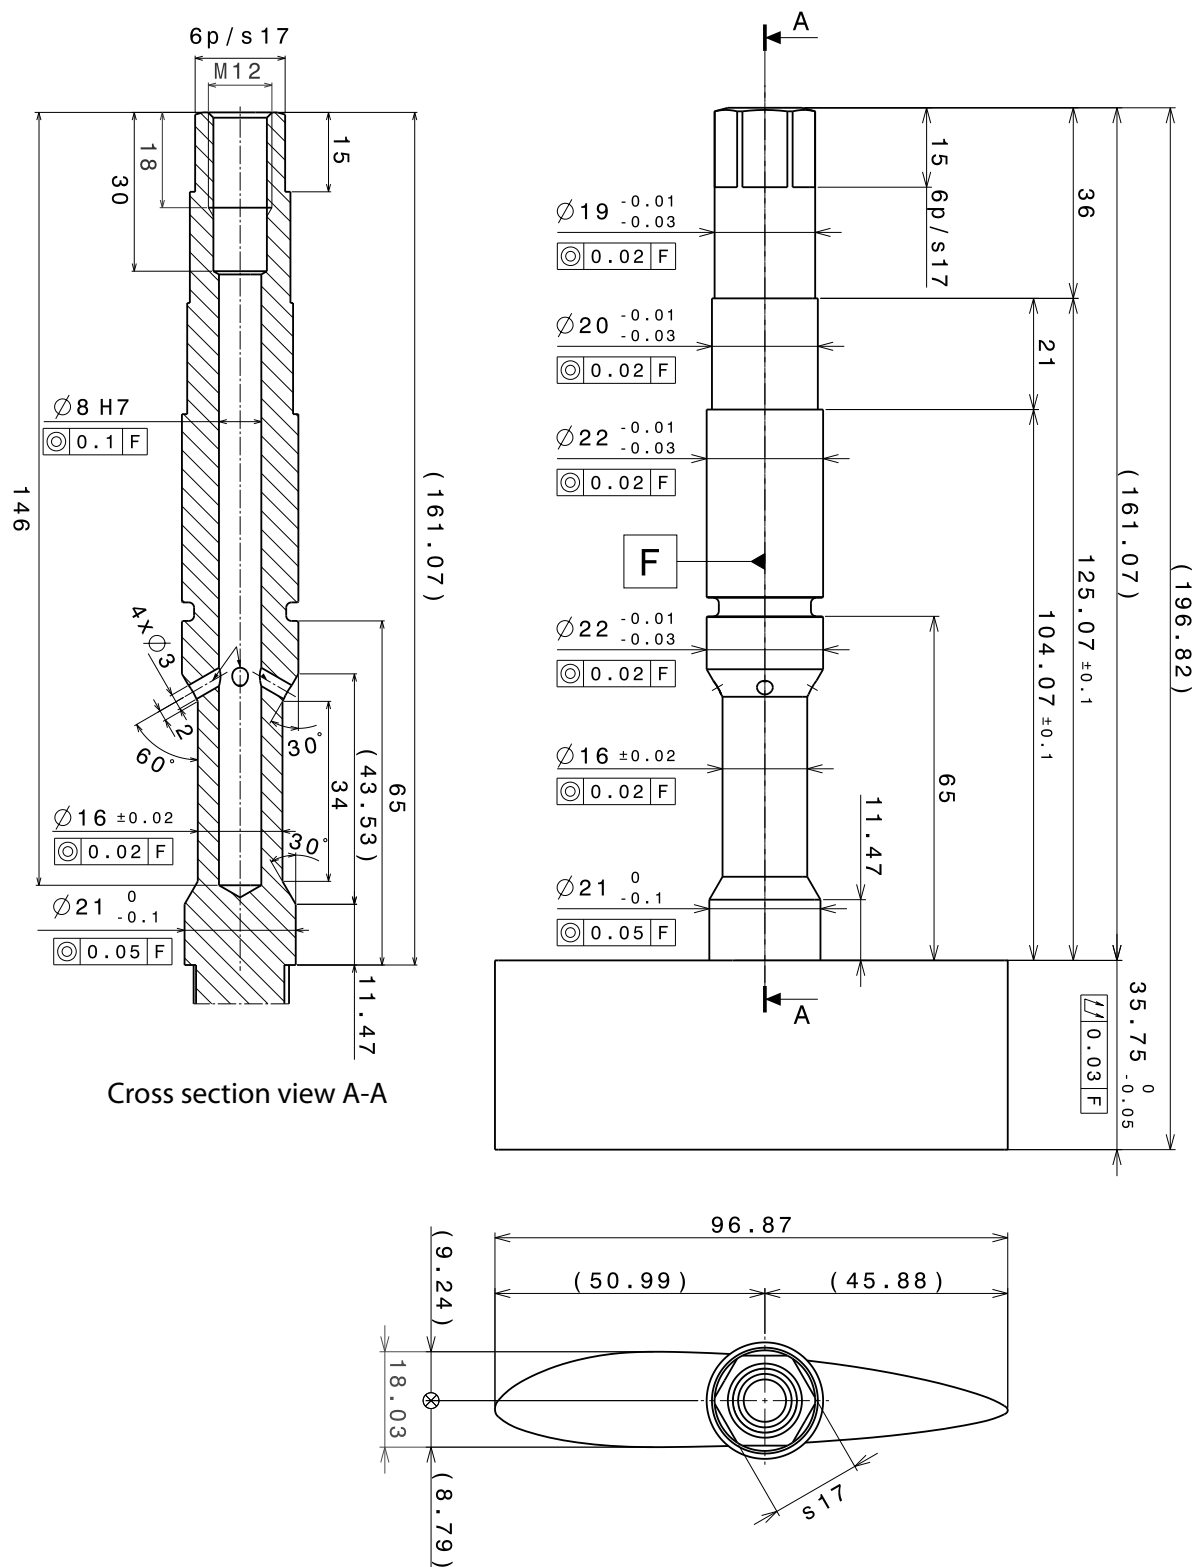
Working drawing of the modified guide vane featuring a flexible stem.
